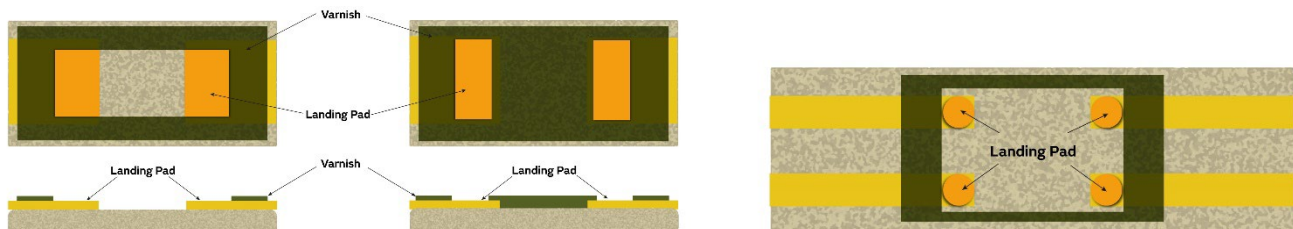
Examples of SMD designs, 2 pads on the left, 4 pads on the right
